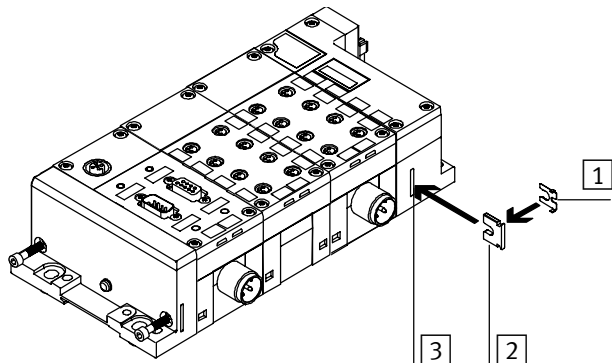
/6: Fastening plate and locking plate in the pneumatic interface (example)
